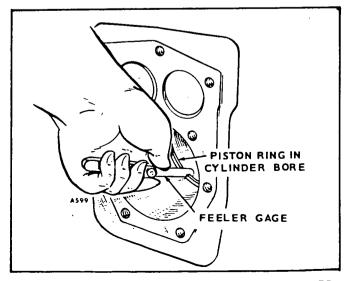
FITTING PISTON RINGS TO CYLINDER
